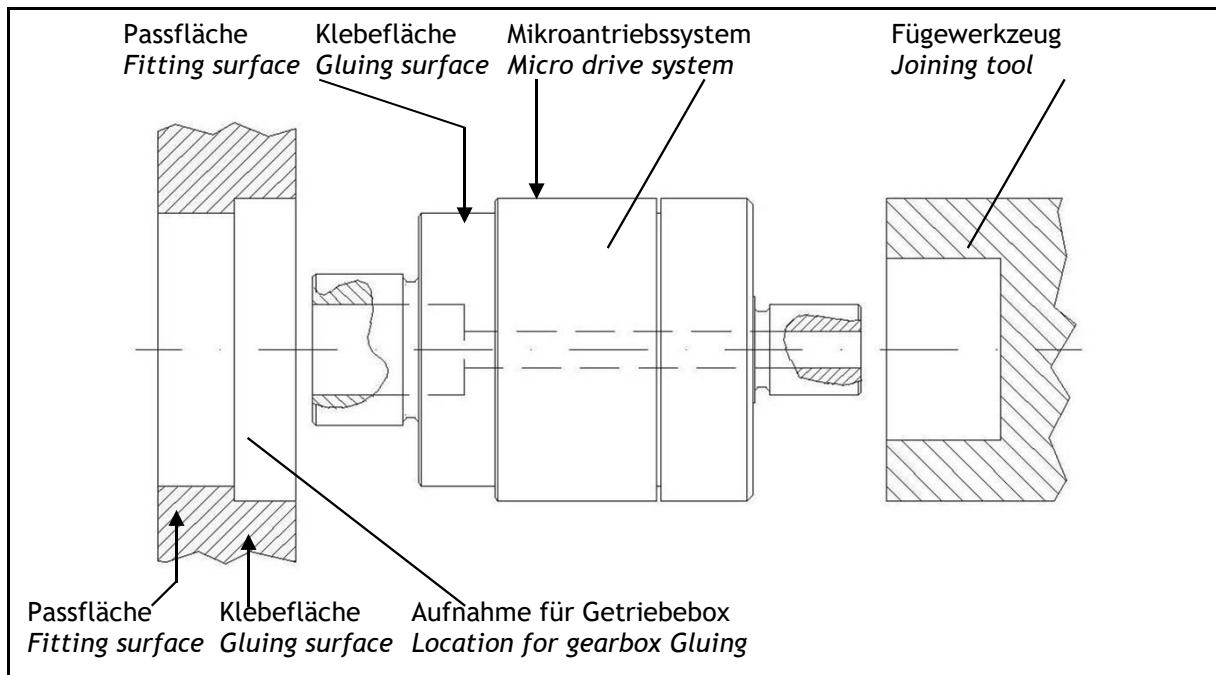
illustrates the basic structure of a joining device for attaching the micro drive system of type MHD/MPG to the support. The centring collar serves the purpose of ensuring an exact alignment of the micro drive system with regard to the application (see figure 1). The position of the micro drive system is defined in radial direction by the centring collar and in axial direction by the stop position.
